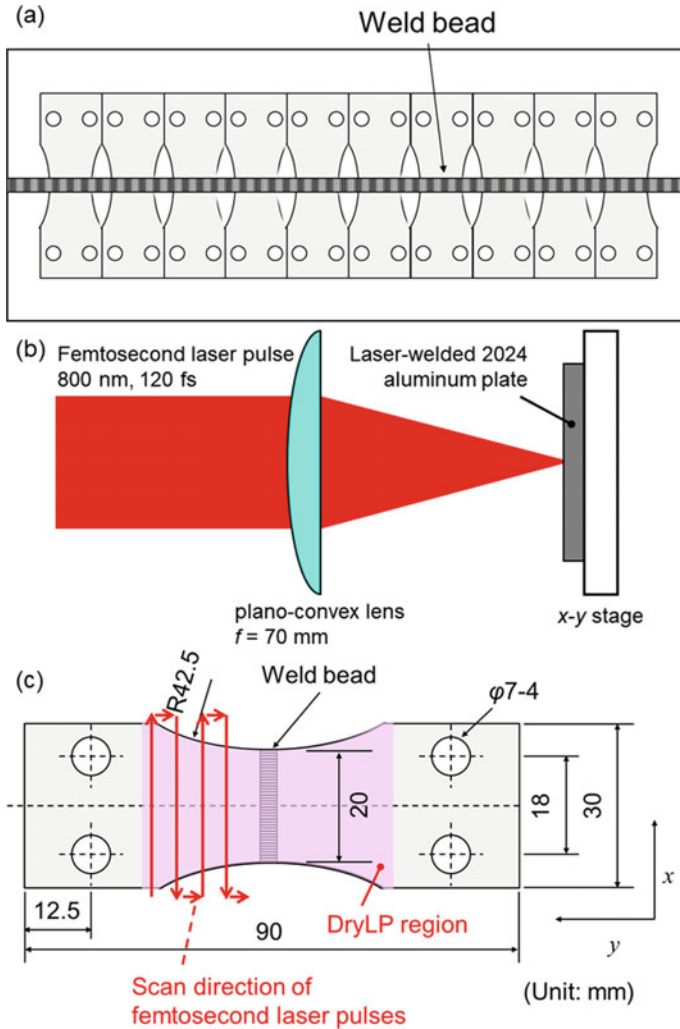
Schematic illustrations of the experimental procedures. a Full-penetration bead-on-plate laser welding and preparation of fatigue test specimens cut from the laser-welded plate. b Dry laser peening (DryLP) process using femtosecond laser pulses. c Geometry of the fatigue test specimens with the weld bead located in the center. DryLP was performed using an x - y automatic stage which sequentially moved the specimen in a serpentine pattern, as indicated by the red arrows [55]
